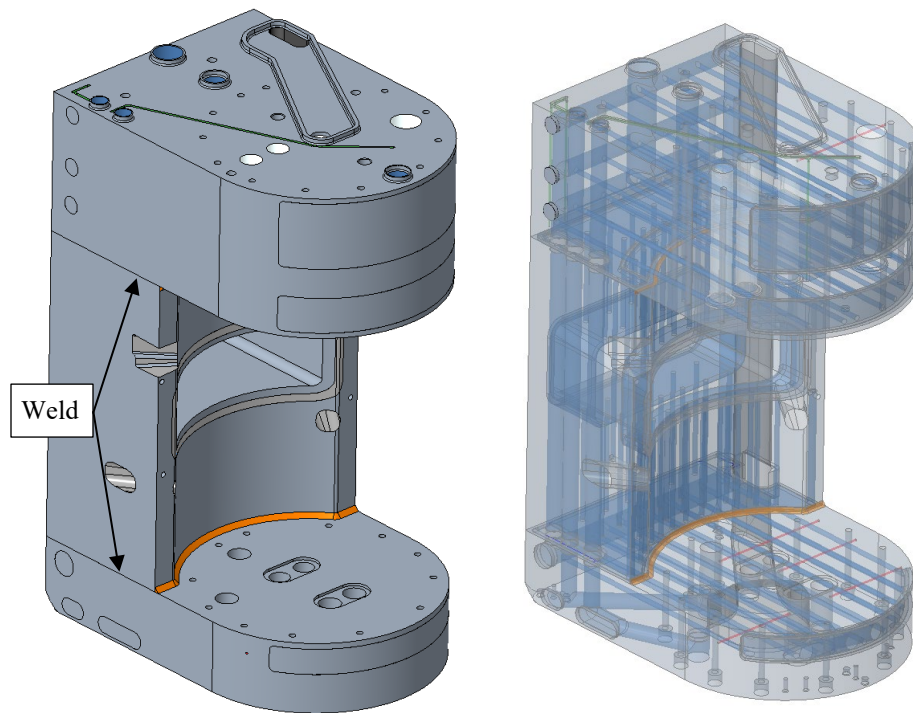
Backbone assembly after welding of lower, middle, and upper backbone.
